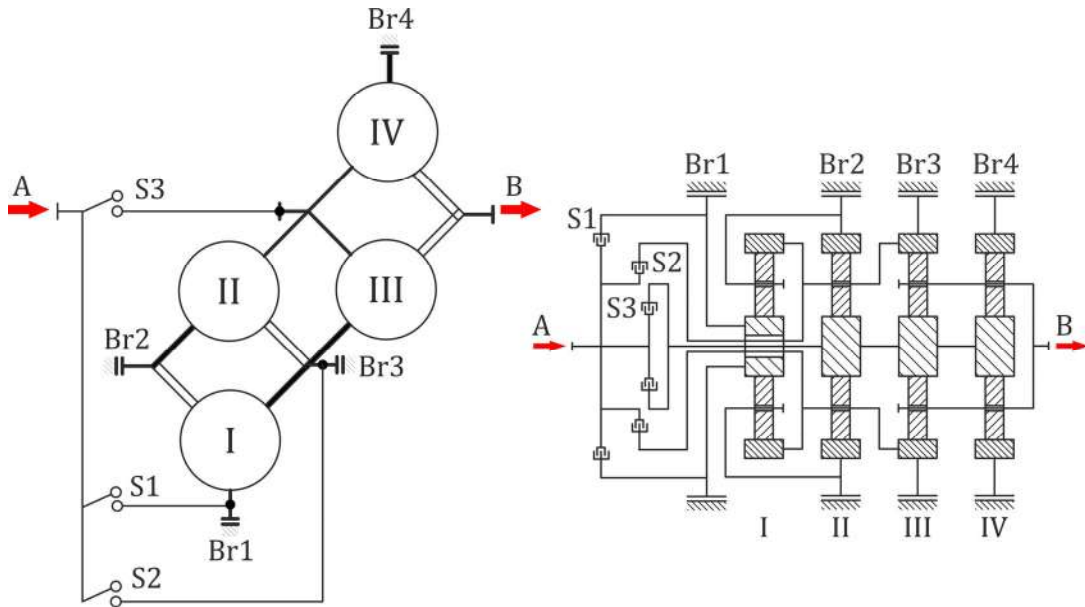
Structural (left) and kinematic scheme (right) of the three-carrier, six-speed ZF 6HP500 gearbox
